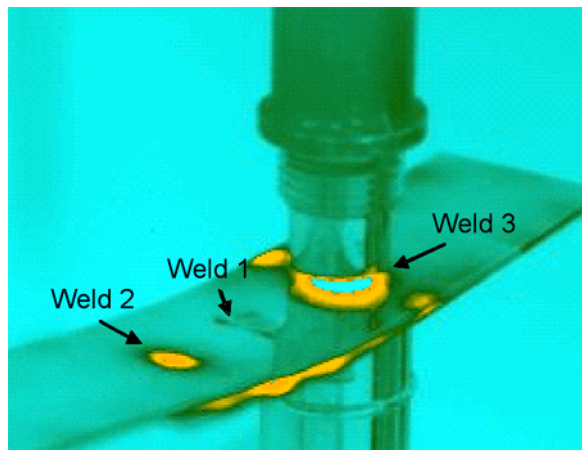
IR Thermal image of multiple spot welds. The third weld is being made.
